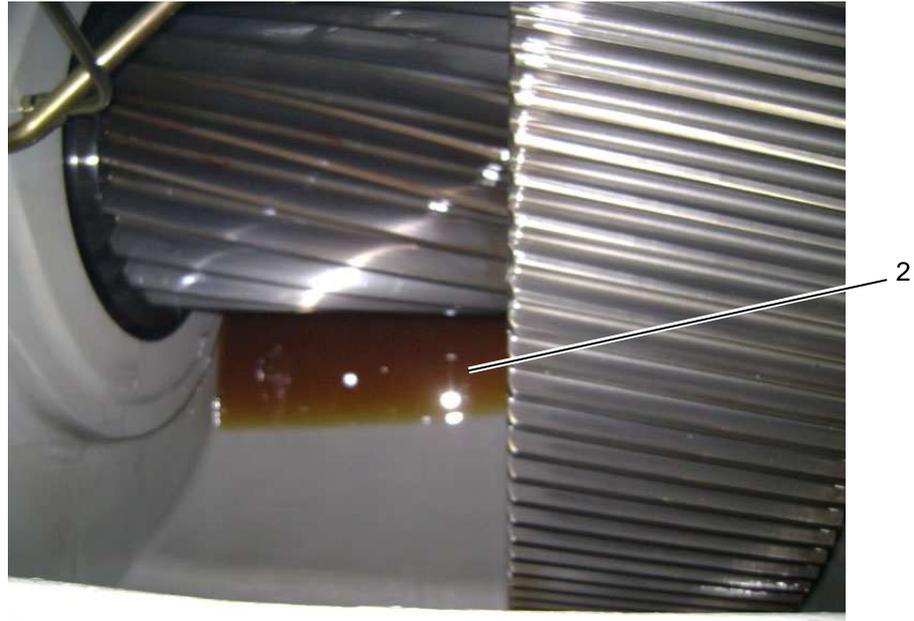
2 Oilsump (example: manufacturer Winergy)
